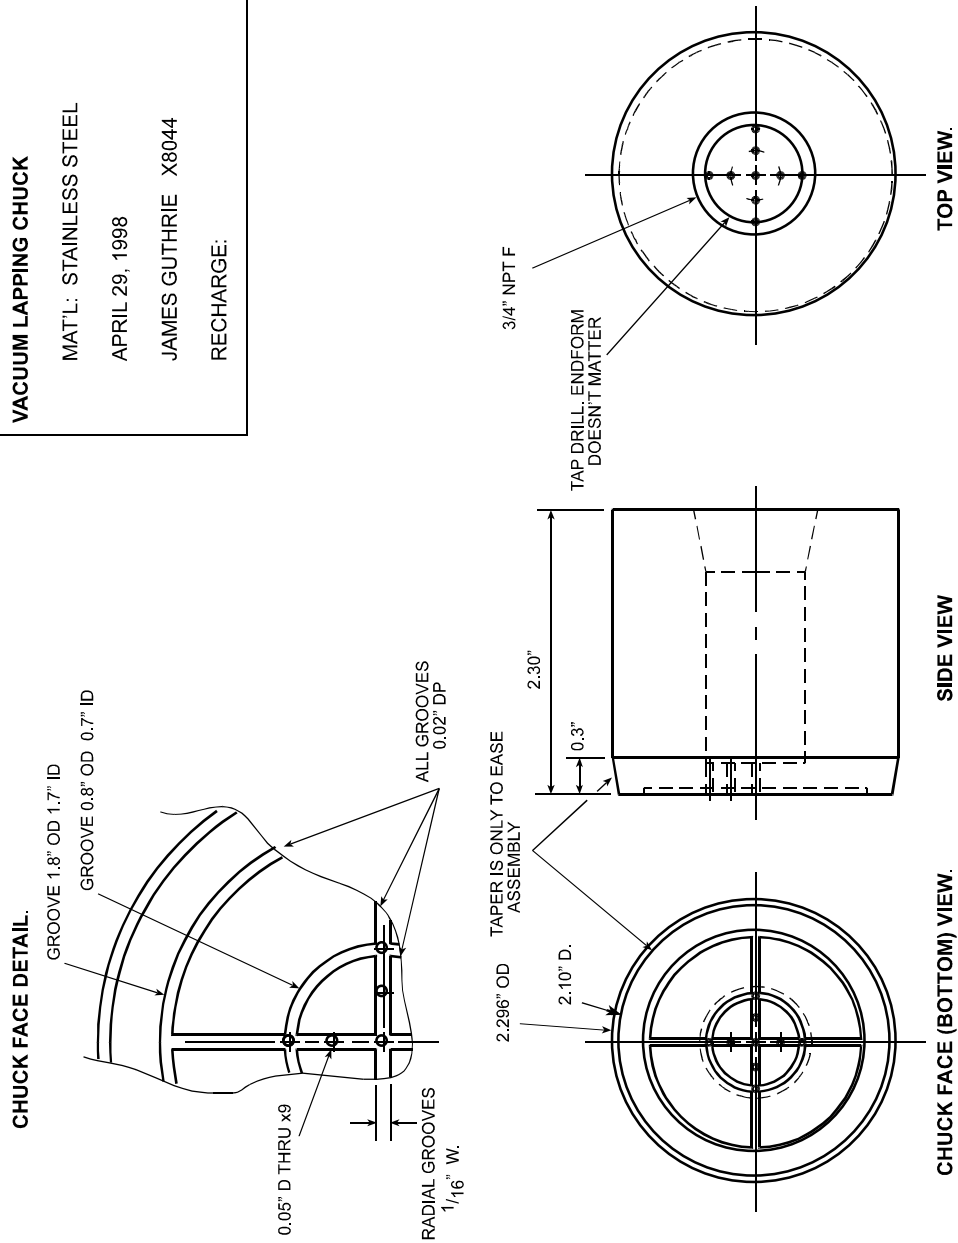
A vacuum chuck fixture for the lapping of full wafers. N.B. that a straight bore and mating o-ring fitting were used in place of the pipe thread in the actual fixture.
